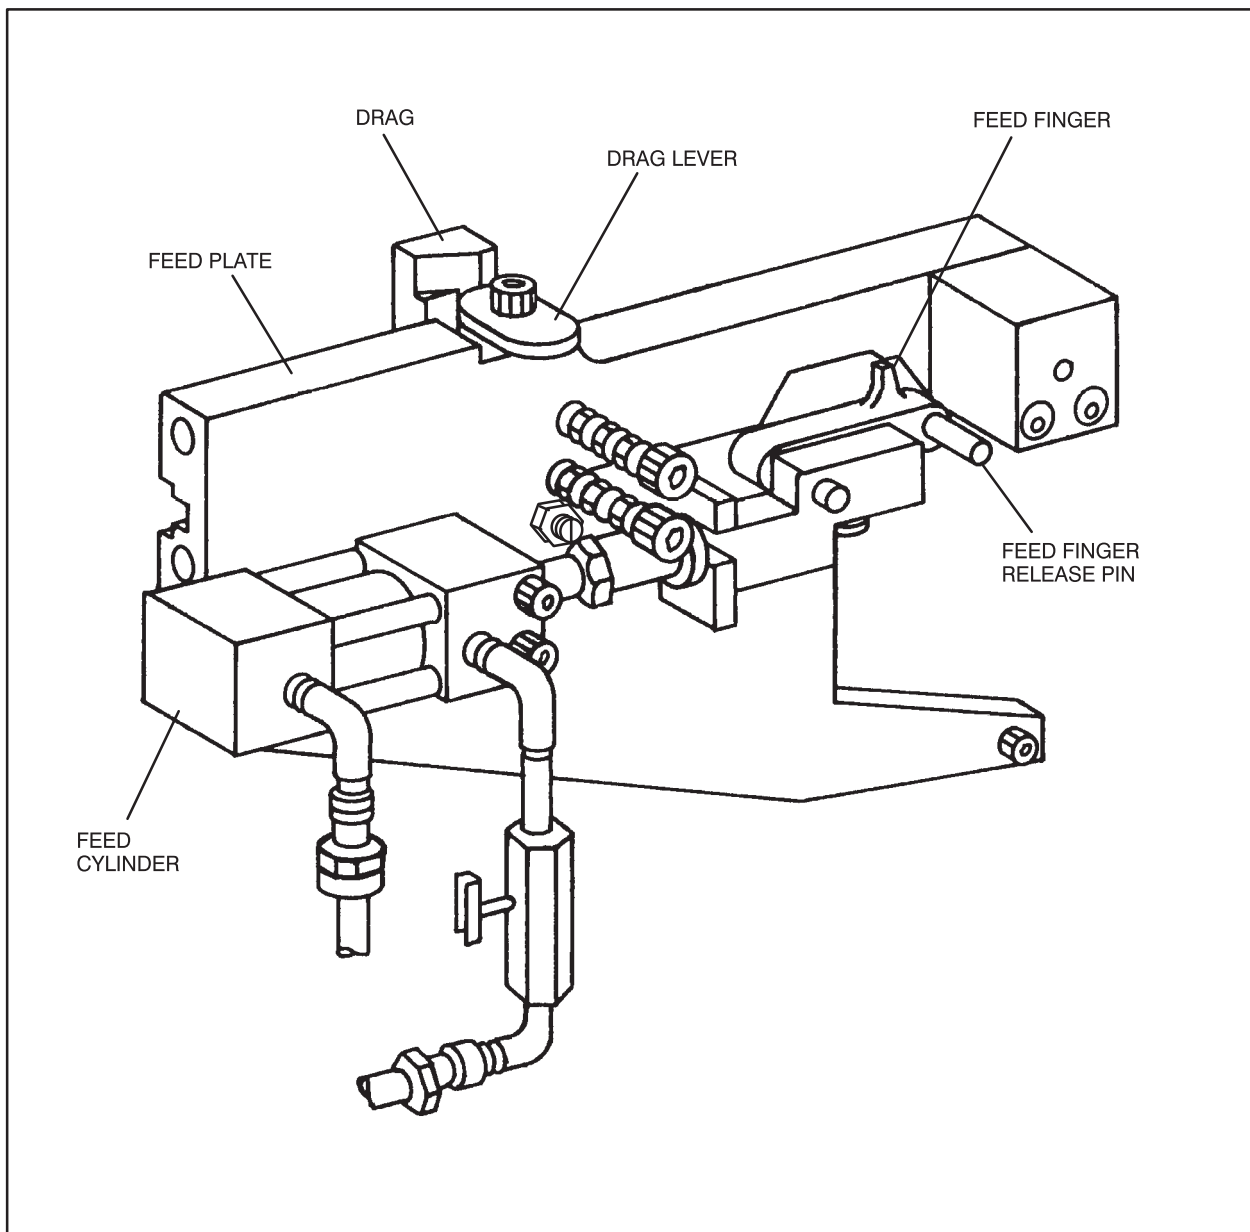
Feed Plate Elements for Terminal Strip Loading
